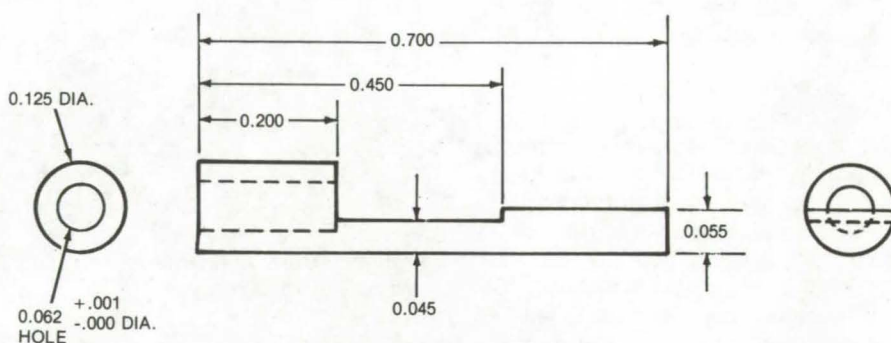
Sheathed-Cable-to-Connector Support is machined from a 1/8 in. O. D. stainless steel.
